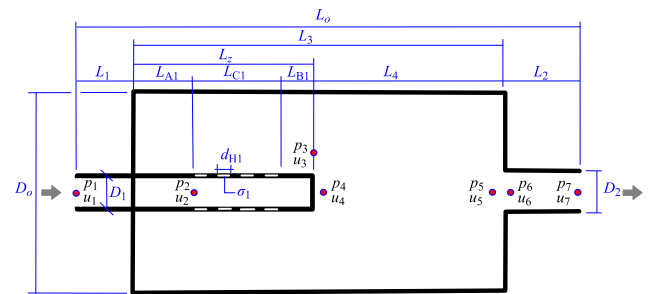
The outline dimension of muffler A equipped with a one-layer diffuser.
